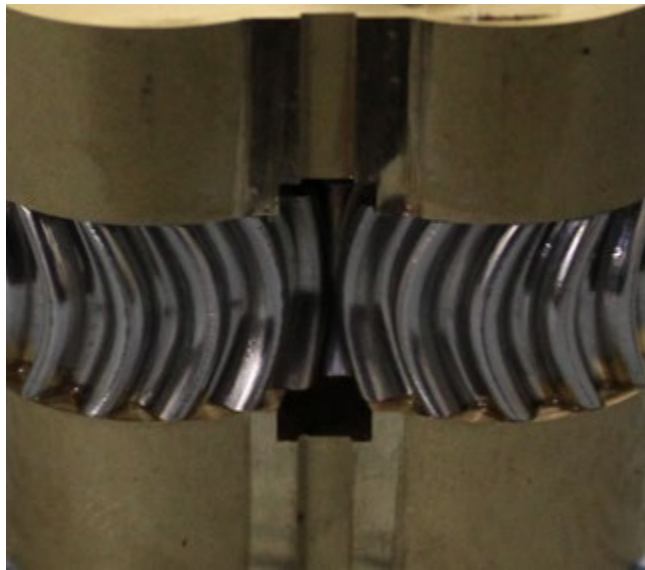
CCAT gear machined using a 5-axis CNC mill
